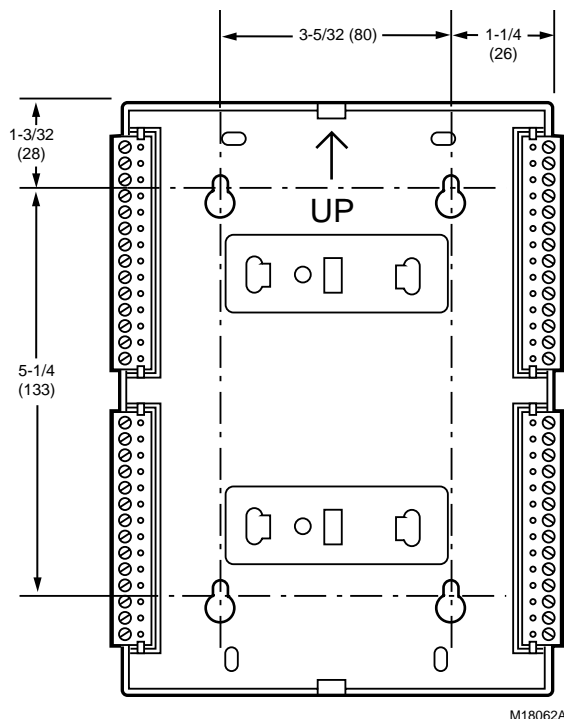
W7760C subbase mounting dimensions in in. (mm).
